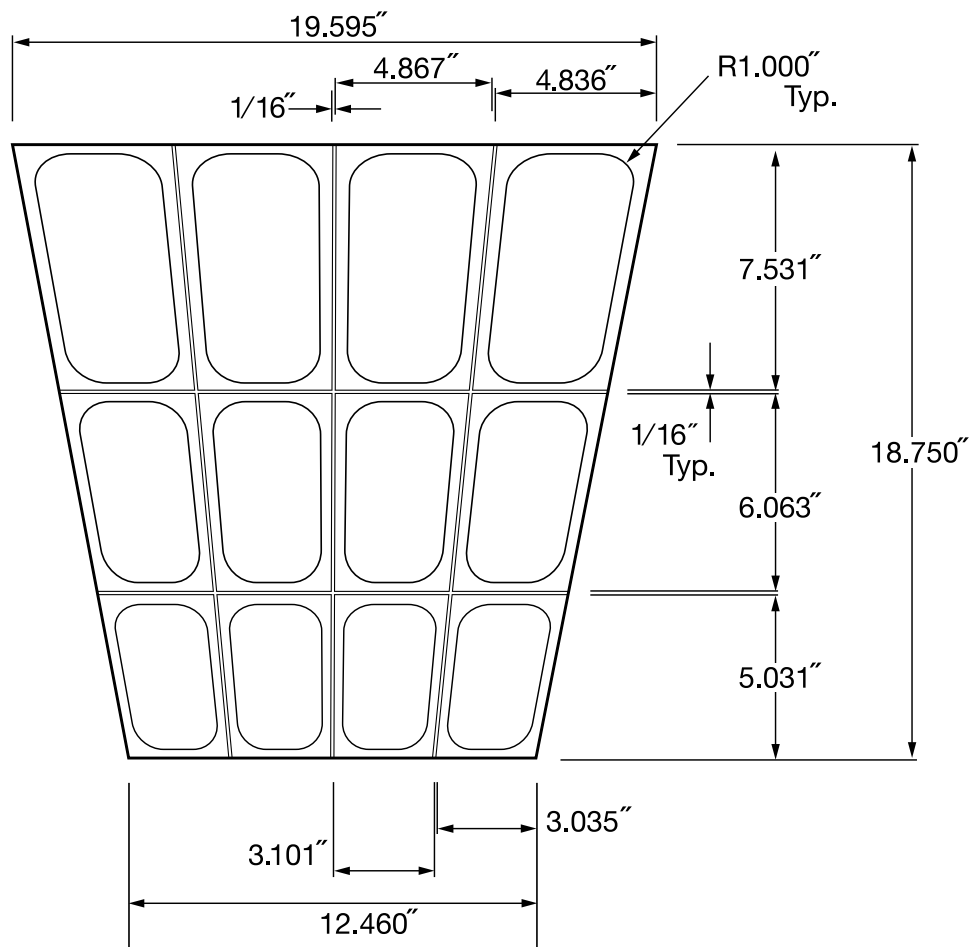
Drawing of a Inner Cryostat Detector super-wedge showing the 12 scintillating tiles
